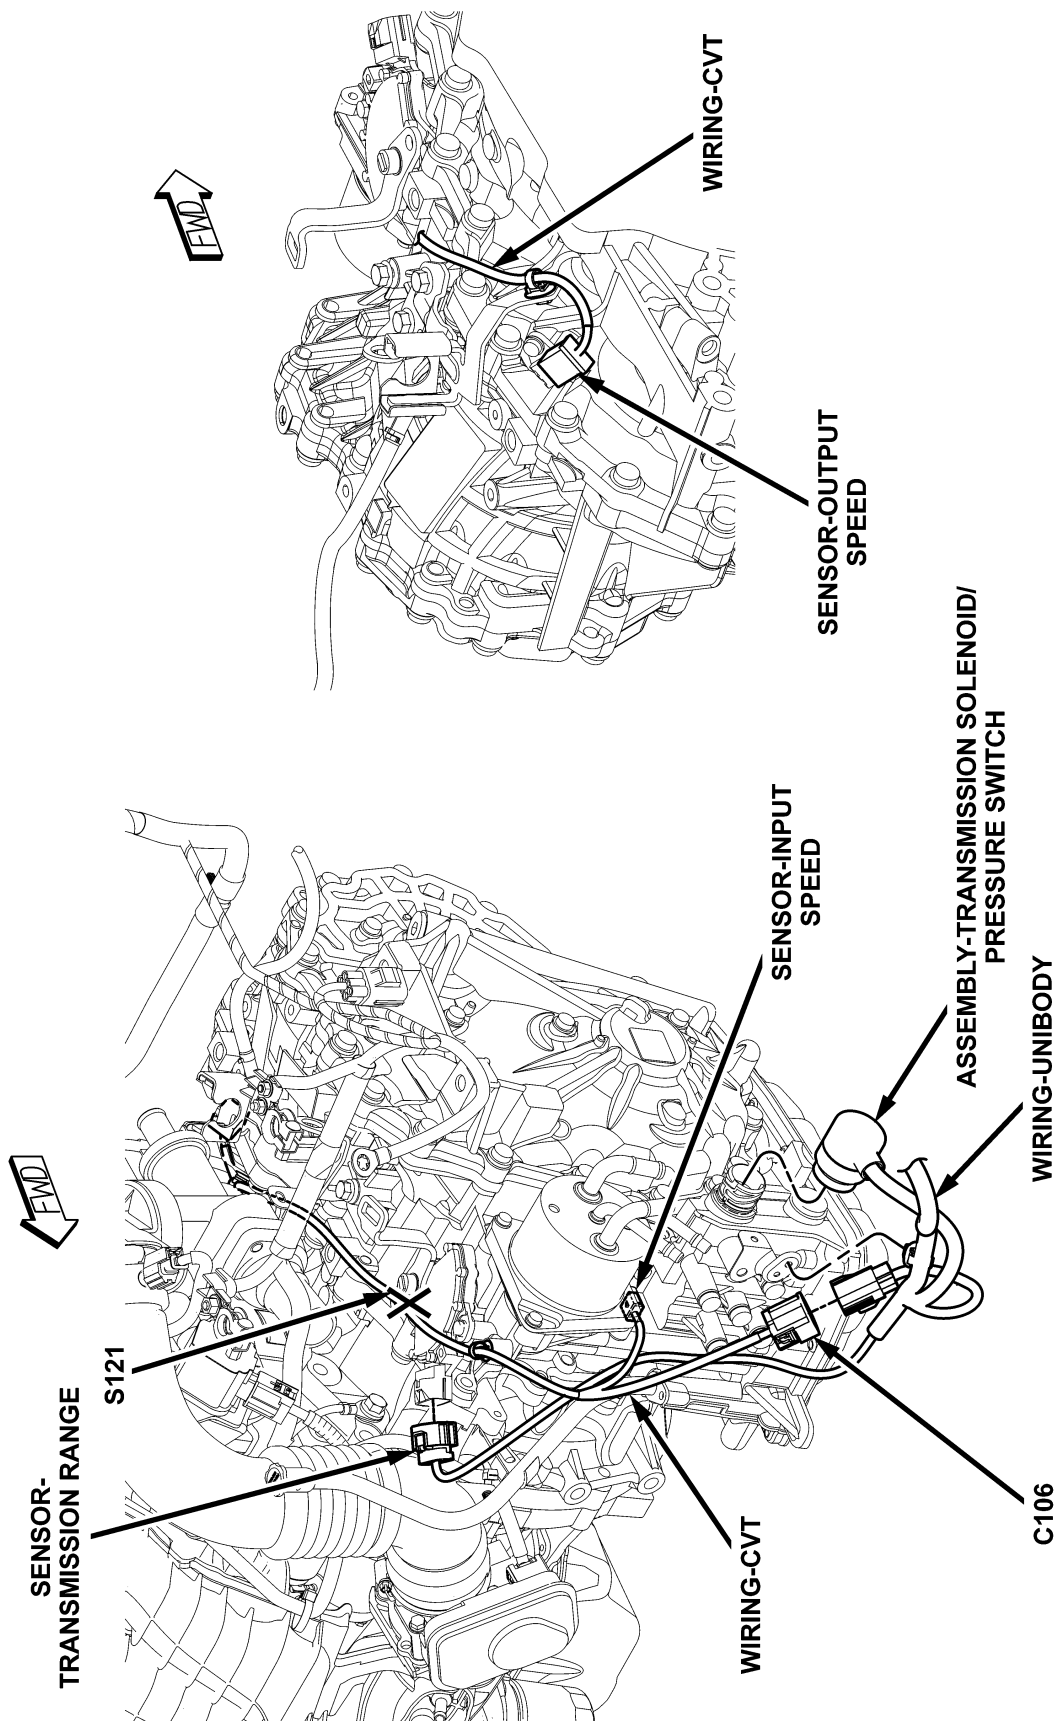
ENGINE - LOWER LEFT FRONT (DIESEL)
